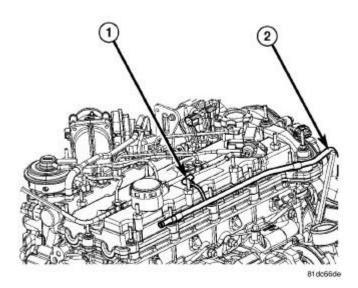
VACUUM SUPPLY TUBE Courtesy of CHRYSLER LLC
